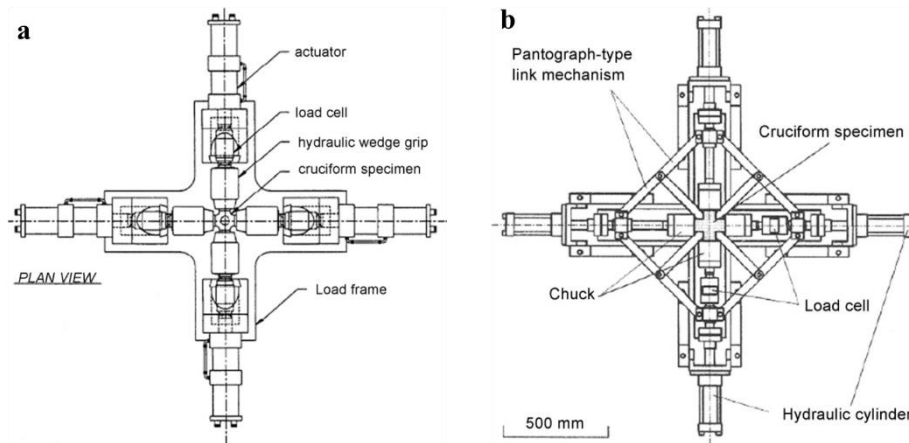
Stand-alone biaxial testing machines: (a) Makinde 1992 [82]; (b) Kuwabara 1998 [83].
